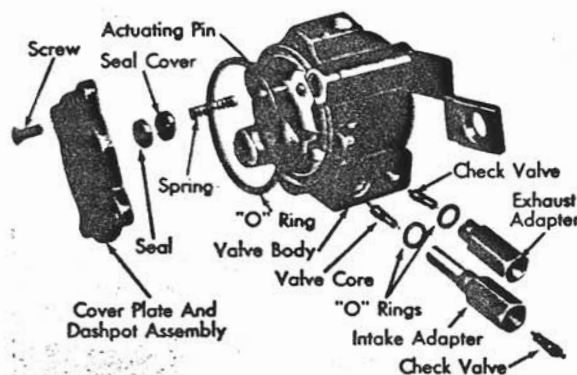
LEVELING VALVE - DISASSEMBLED
